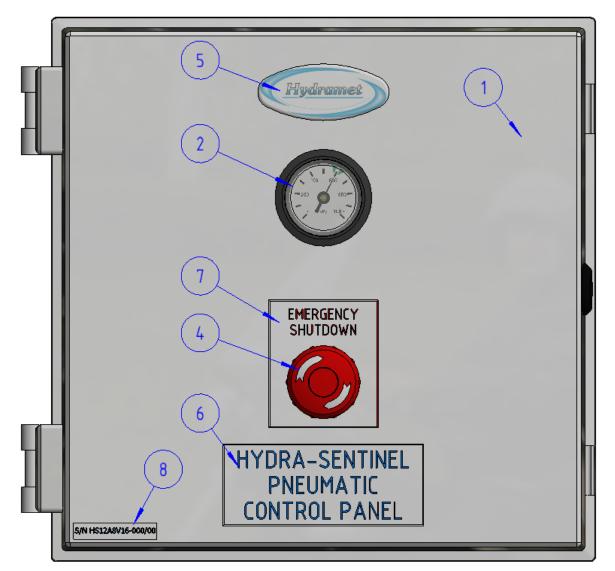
Pneumatic Control Panel Door Outer Components Layout
